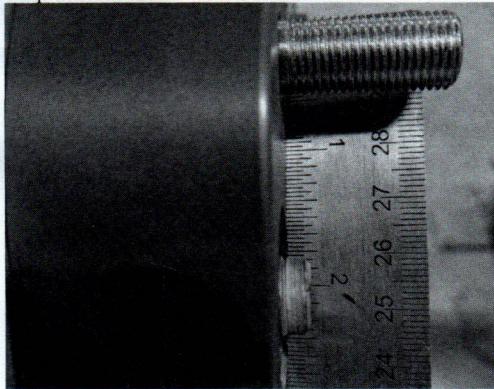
OEM Wheel Studs Extending Beyond Face of Wheel Spacer
